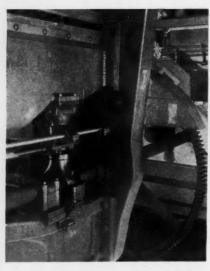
The ram and gear of this 10-ft, bending brake were speedily and efficiently repaired by arc welding.
